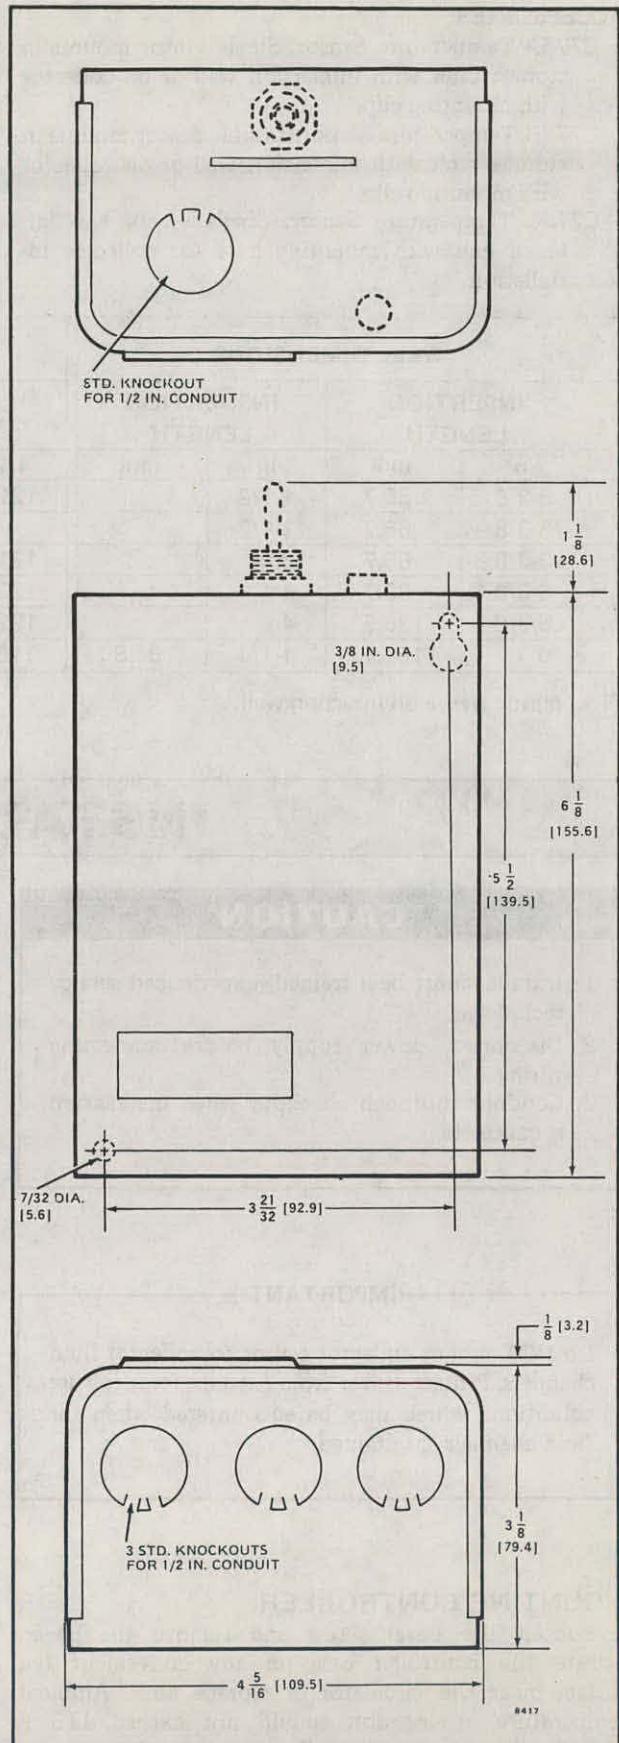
R7412 MOUNTING DIMENSIONS IN INCHES
